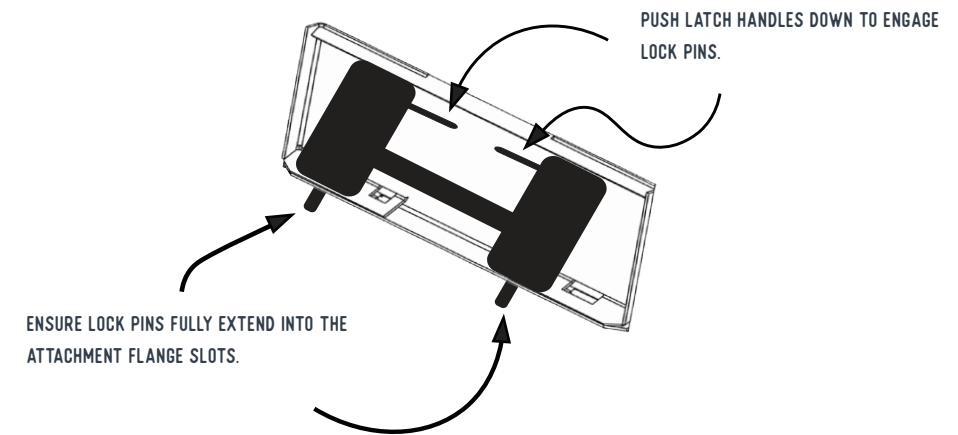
B QUICK ATTACH MECHANISM LOCKED TO ATTACHMENT PLATE
